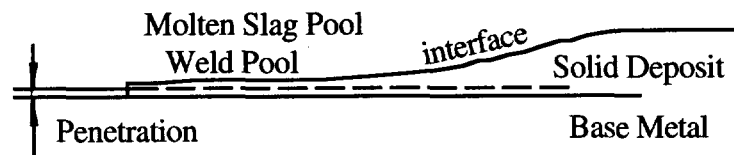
Illustration of the Weld Metal Solid/Liquid Interface of Nickel Alloy 625 Electroslag Surfacing.
